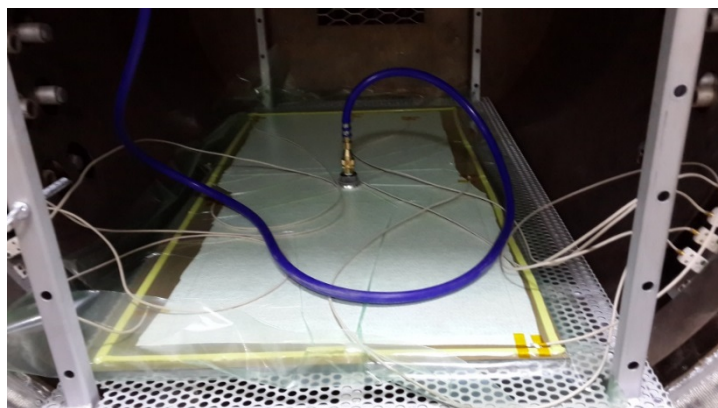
Flat composite plate bagged up on a steel tool inside the autoclave.
